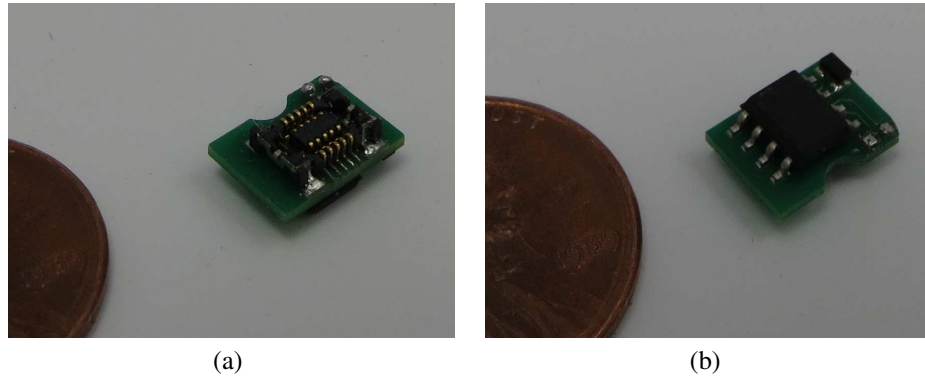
Photographs of solenoid controller PCB. (a) Top view. The upper side of the PCB is occupied by the male side of a 12 pin board to board connector for connection with the flexible main controller board. (b) Bottom view. The side of the PCB facing the module's interior houses an h-bridge and a diode.
